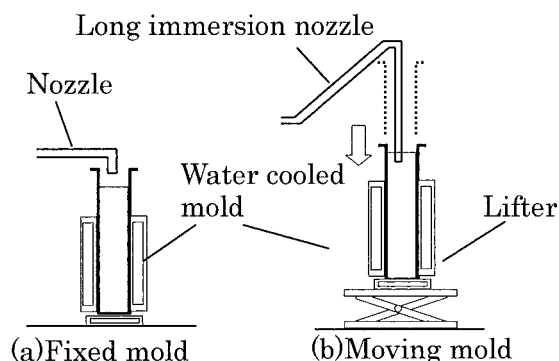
Schematic view of molten metal pouring nozzles and mold motion.
